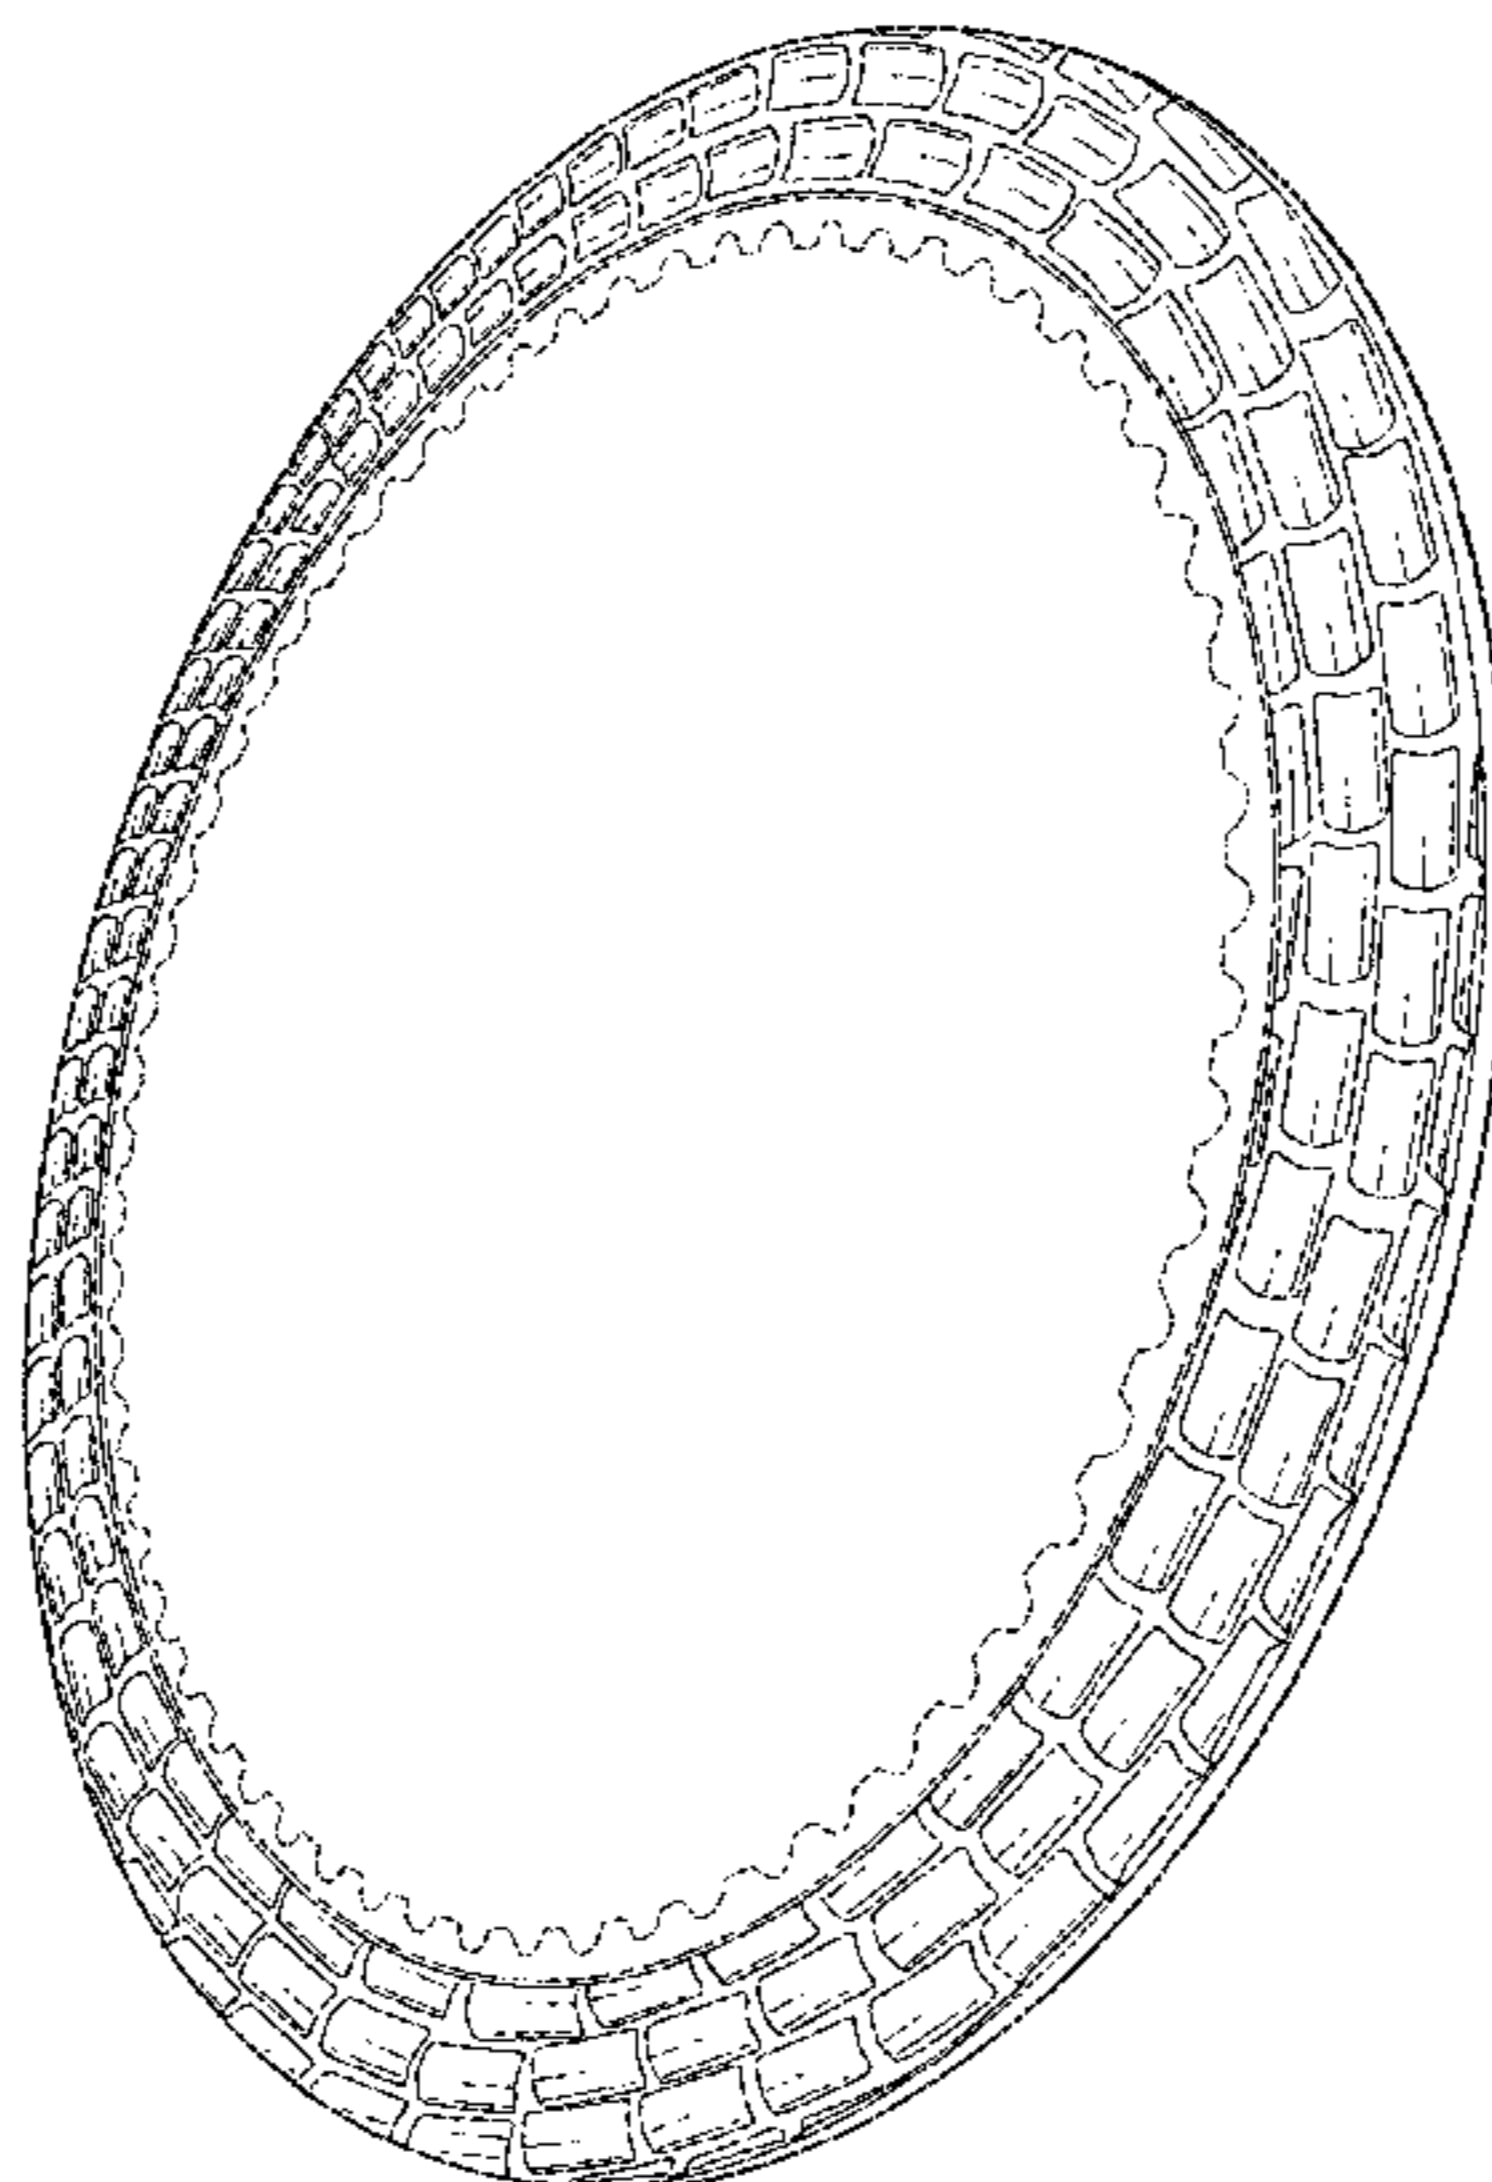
is a front view of a second embodiment of a friction disc with surface pattern; and,
